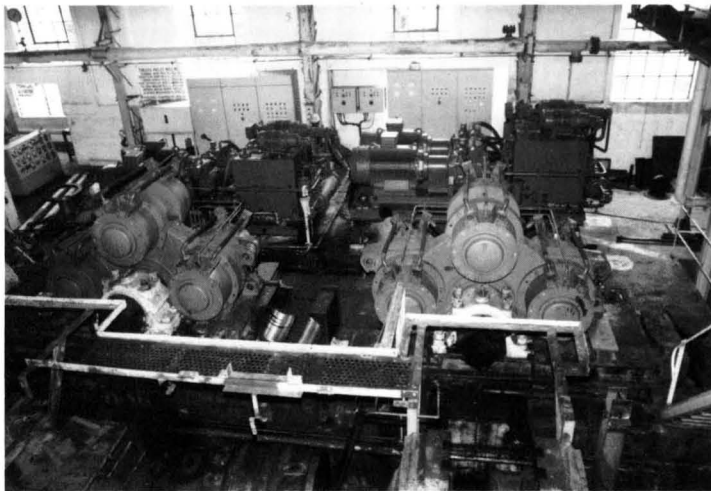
The two drives assembled with square ended shafts ready for coupling to the cane mills; the power pack and electrical control cubicle are at the rear
